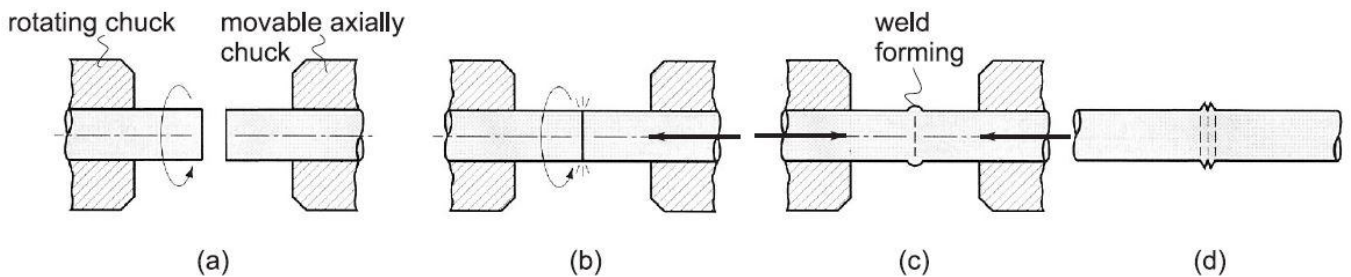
Friction welding: (a) no contact, (b) parts brought into contact to generate friction heat, (c) rotation stops and axial pressure applied, (d) final product showing the flash.
